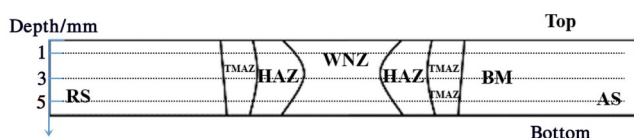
Schematic diagram of cross-section of welded joint
